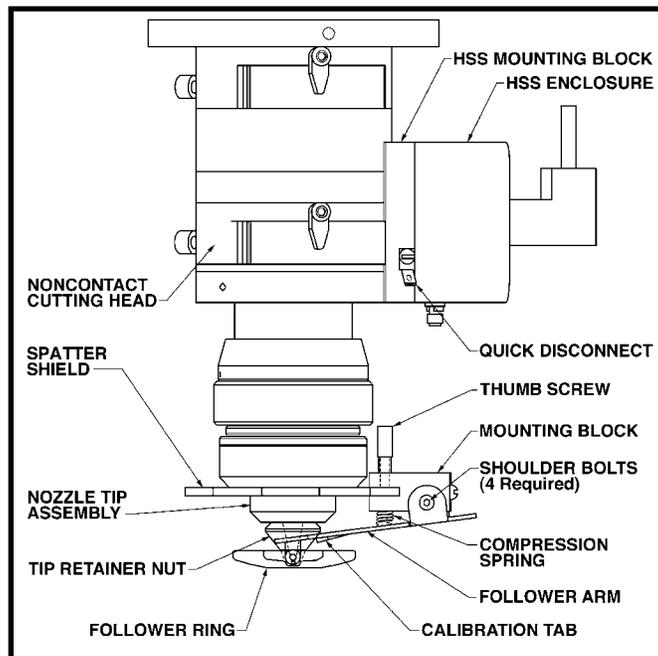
Noncontact Cutting Head with Tactile Foot
